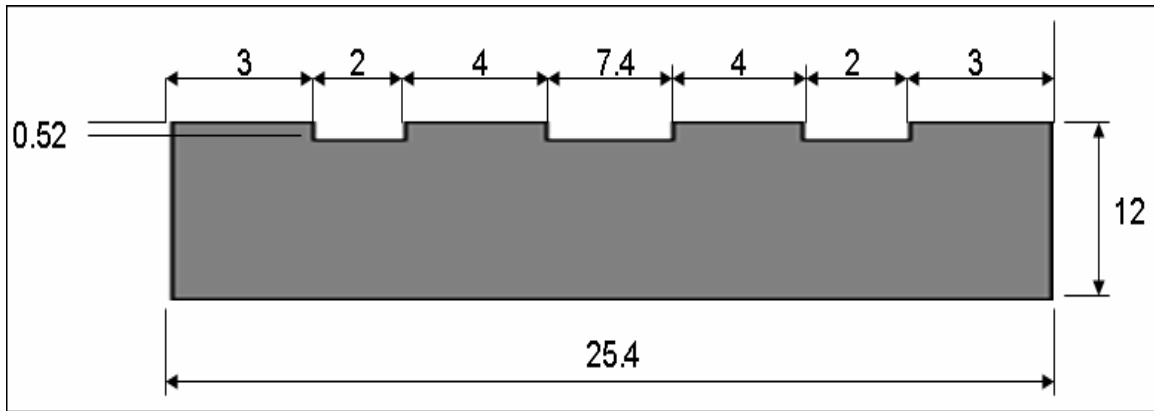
Sample holder design (side view). Units are in millimeters.
